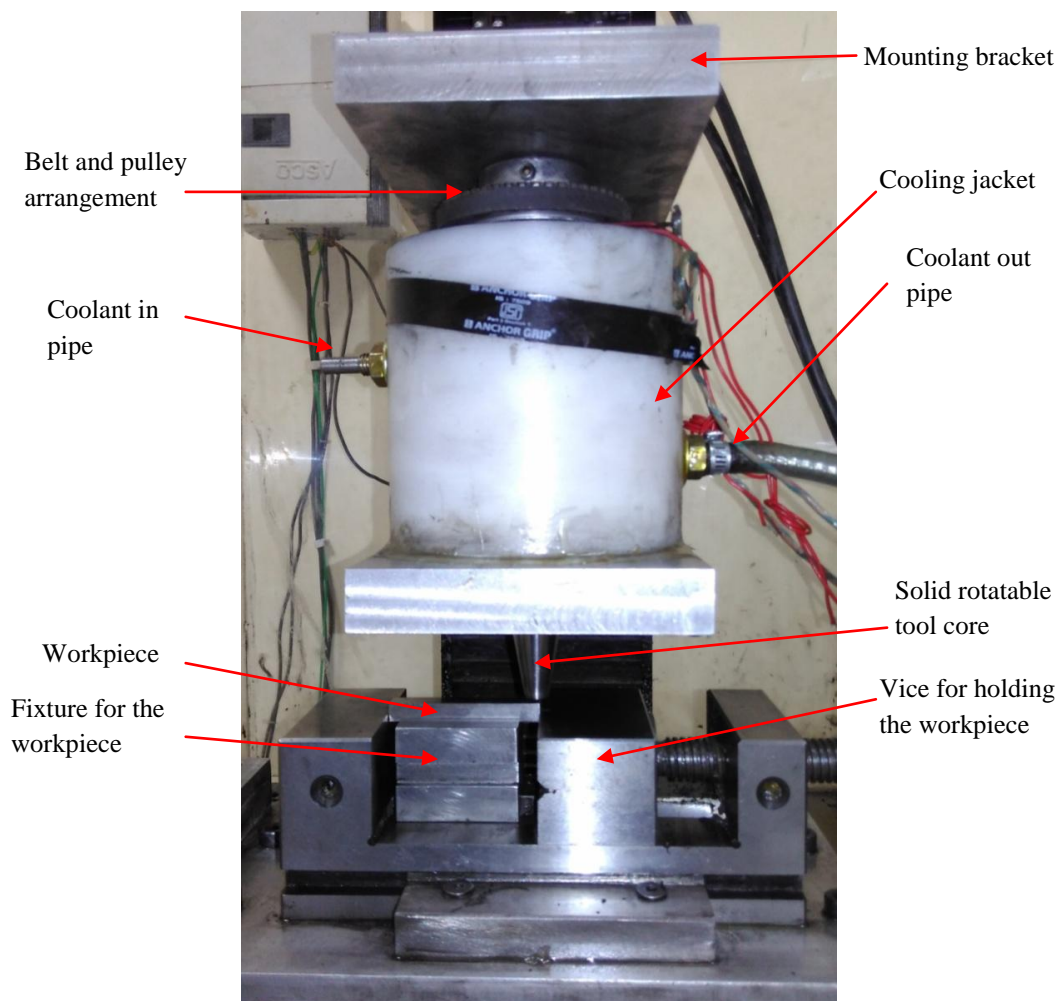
Tool being held using the mounting bracket and the workpiece clamped in the vice
